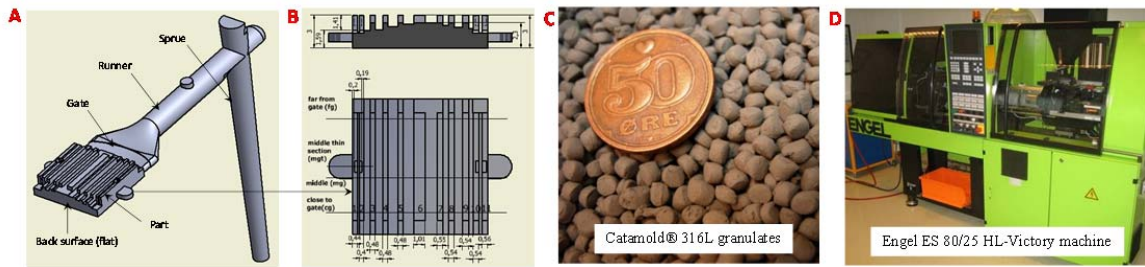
Test geometry used for the experimental investigation of metal injection moulding (picture A and B), Catamold granulates (picture C) and injection moulding machines used for the experiment (picture D).
